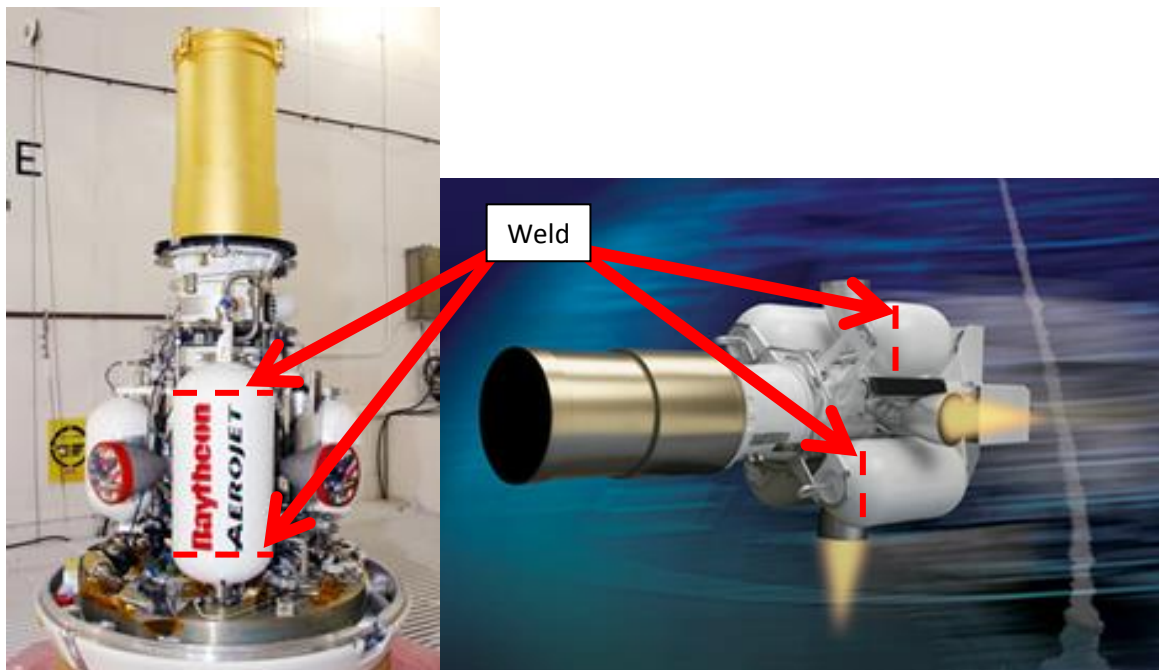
Sample images of rocket propulsion systems that Aerojet Rocketdyne manufactures. The white hemispherical tanks are where the primary aluminum AC-TIG welds occur.^[3]
